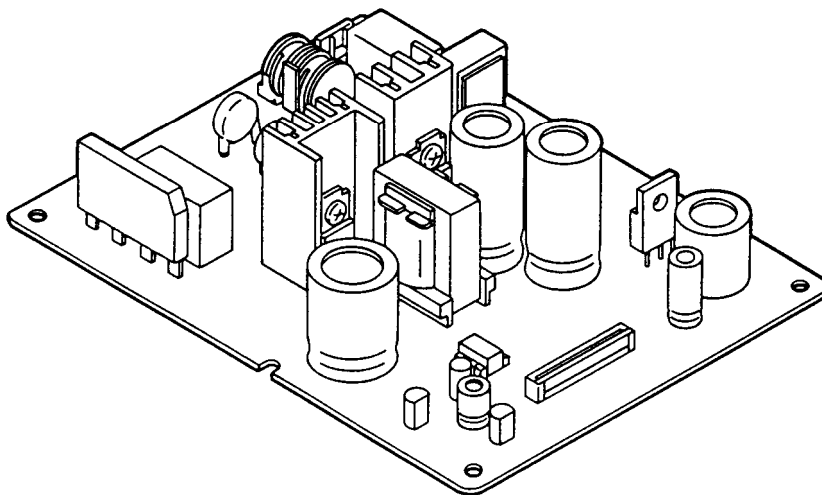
BOARD ASSEMBLY, C076 PSB/PSE (Power Supply Circuit Board)
